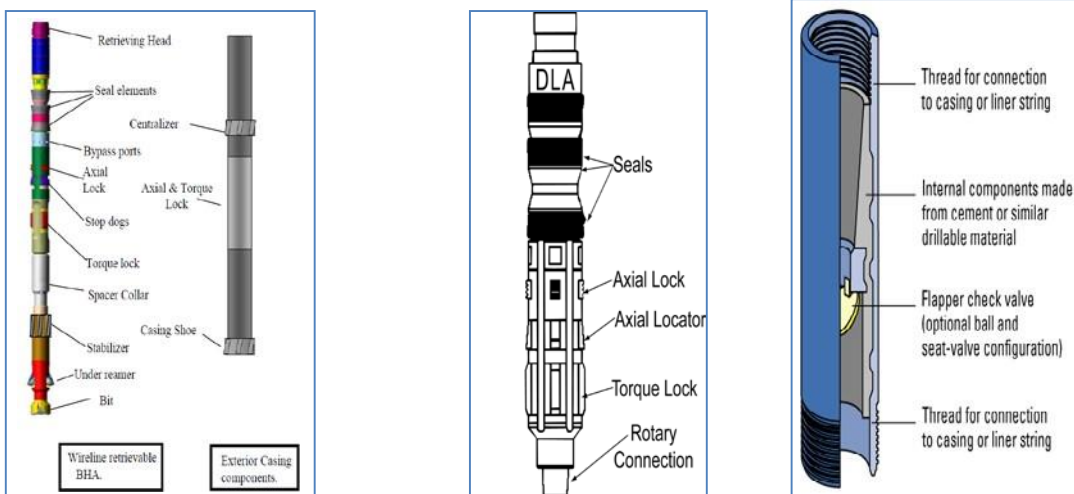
Bottom Hole Assembly [5] Figure 2-5: Drill Lock Assembly [3] Figure 2-8: Float of Retrievable Collar [3]
